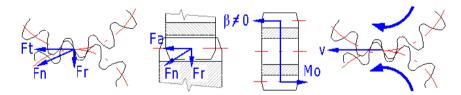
tangential, radial and axial forces at helical spur gears [21]
